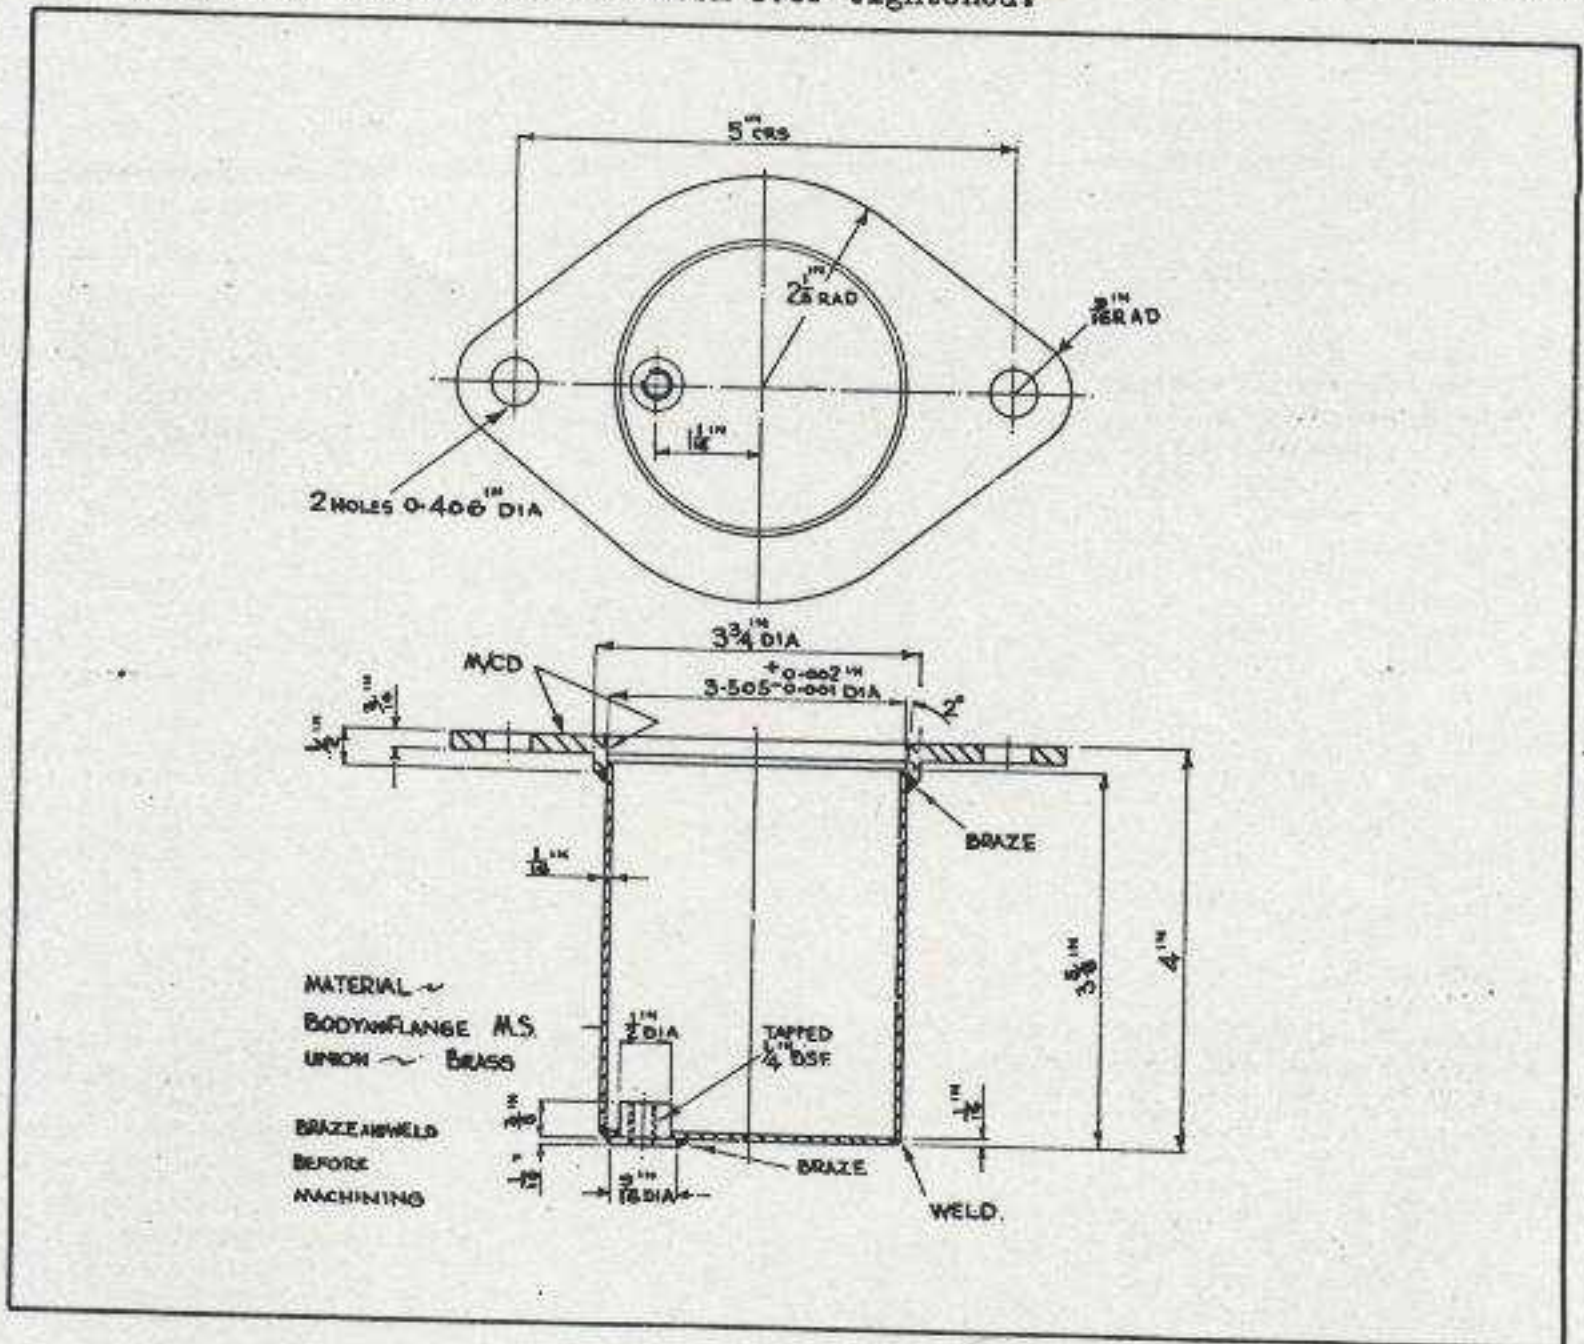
STARTER MOTOR NO 1, MK 2 - COVER, SEAL TESTING, DRIVING END (LOCAL MANUFACTURE)
